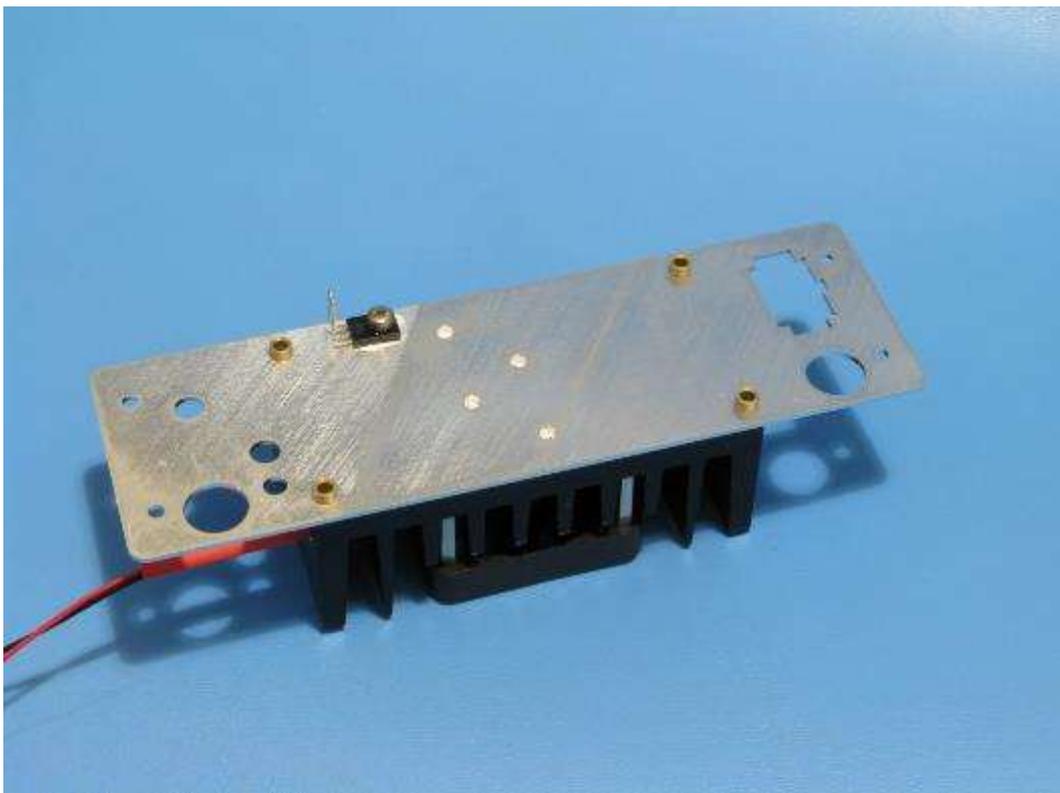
Place the rear plate. Apply thermal grease to the back of Q3 and install Q3. Place the PCB spacer tubes
